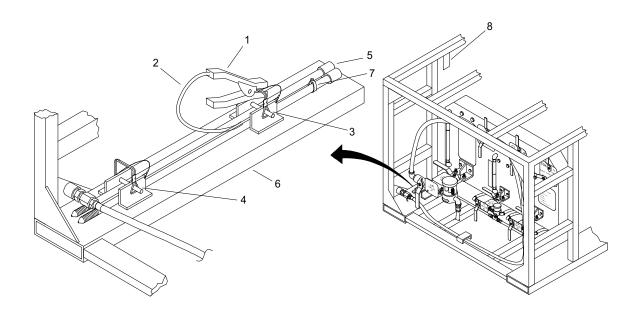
Fuel Additive Injector Assembly Grounding Rod Assembly.
